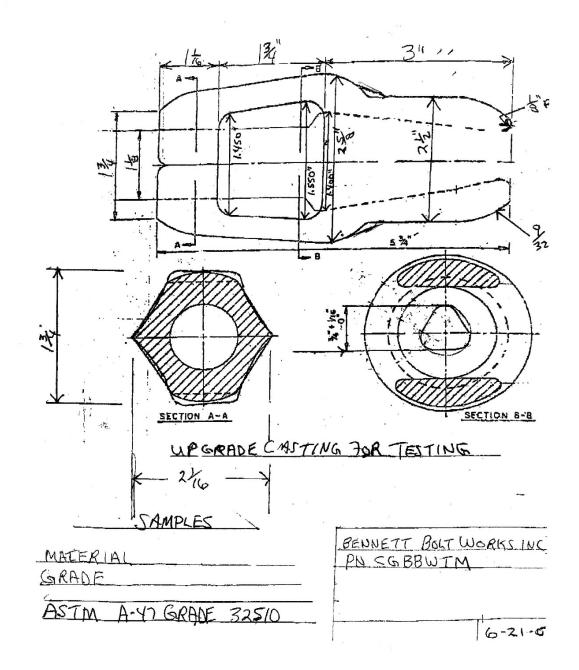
Bennett Bolt End-Fitting Material Specifications
